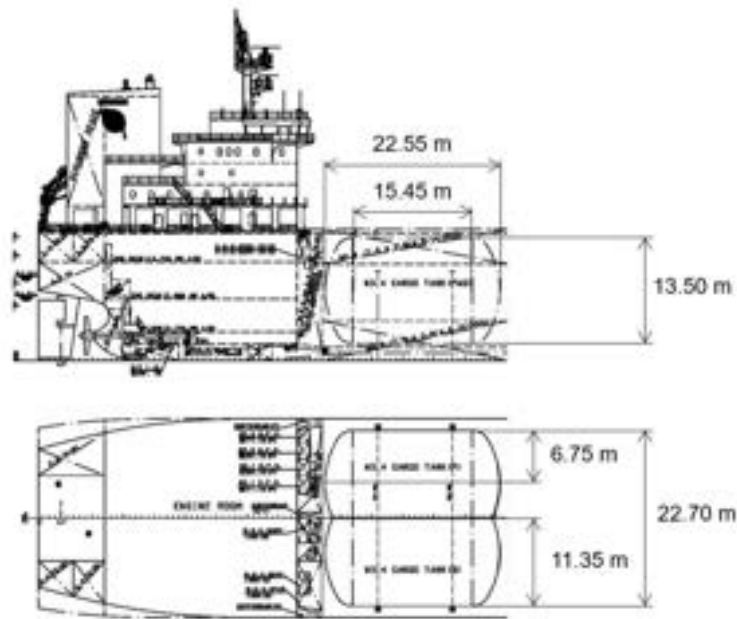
Cargo hold and bi-lobe tank main dimensions [18].
